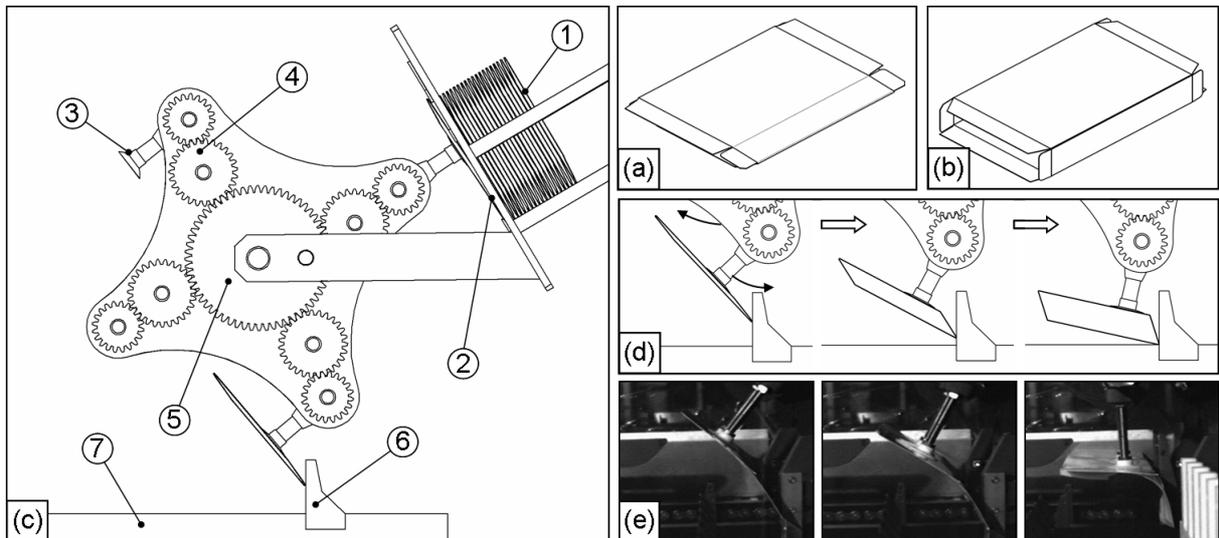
(a) Skillet. (b) Erected carton. (c) Erection mechanism showing skillets (1), feed aperture (2), vacuum cups (3), epicyclic gear train (4), sun gear (5), backstop (6) and fixed rails (7). (d) The mechanism erects the skillet by forcing one edge against the backstop. (e) Frames from high speed video footage of a carton failing in buckling.
